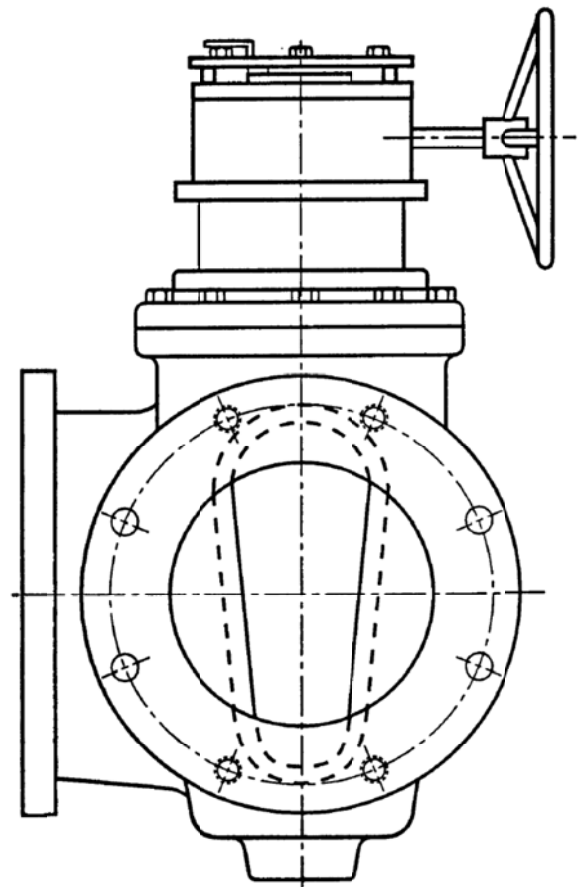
3-WAY PLUG VALVE WITH ACTUATOR
